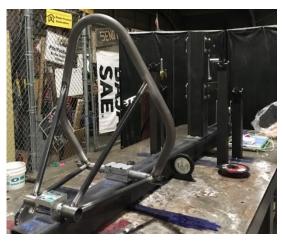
Roll hoop and rear triangle set up, using tube blocks to locate for wheel spacing, as built.
